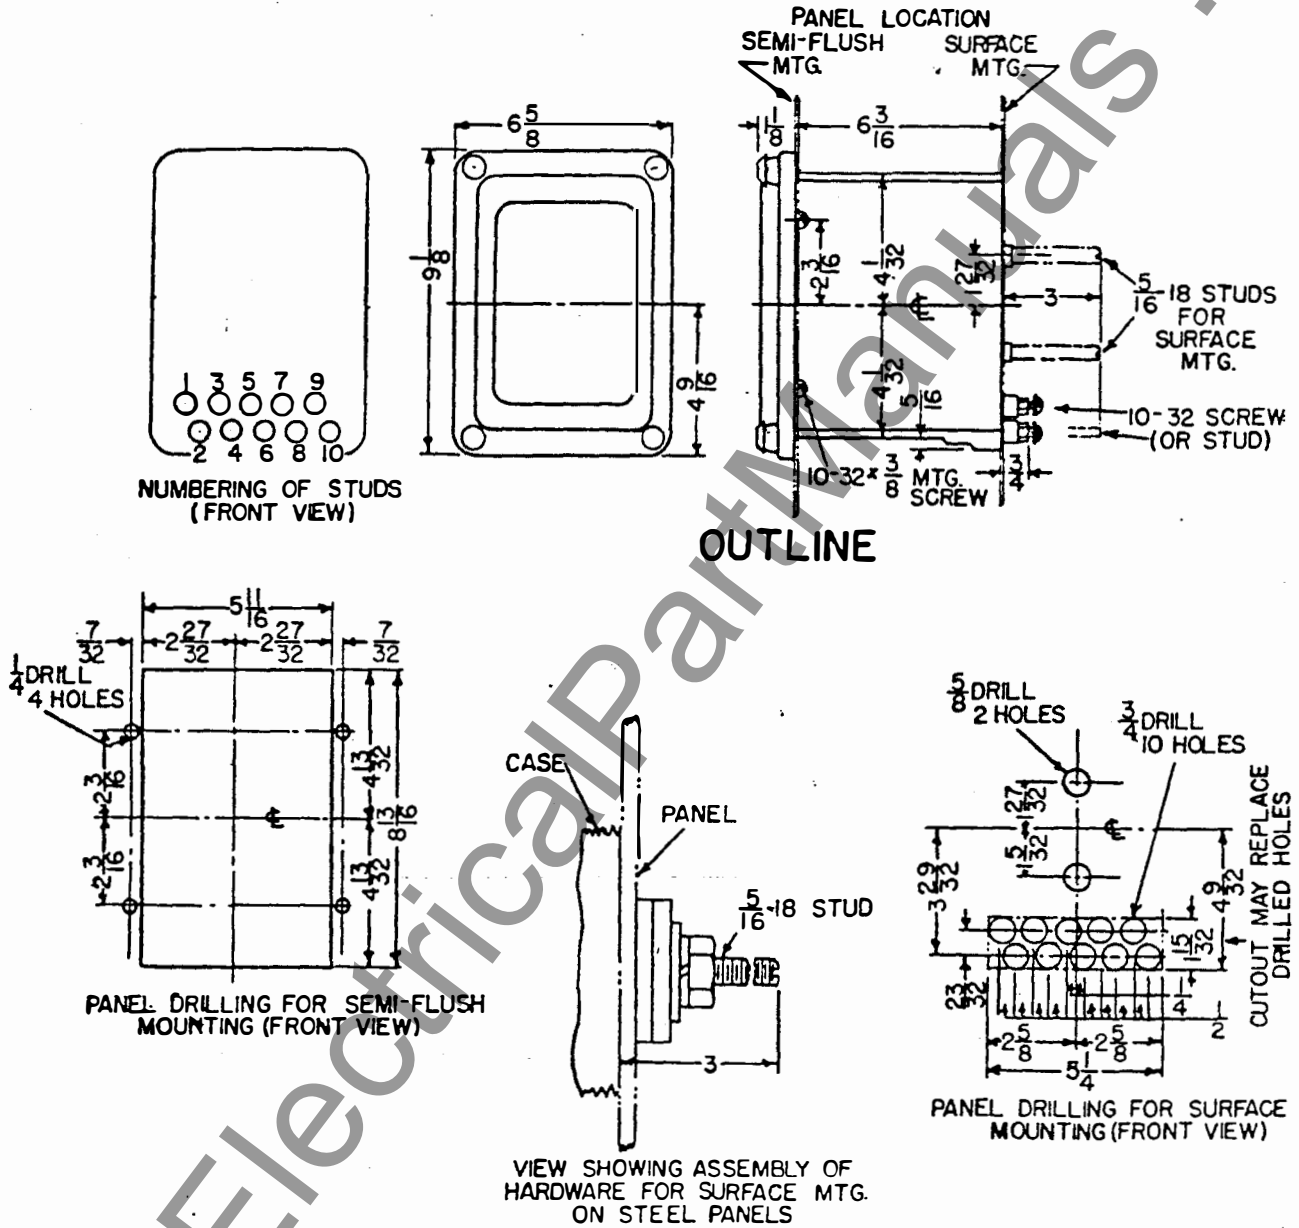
Outline and Panel Drilling Dimensions for Size S-1 Case
